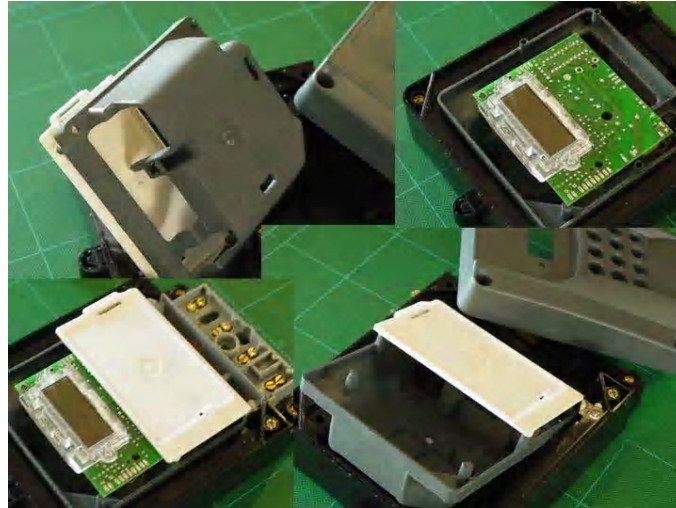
First-off-tool injection-moulded parts fitted with components
